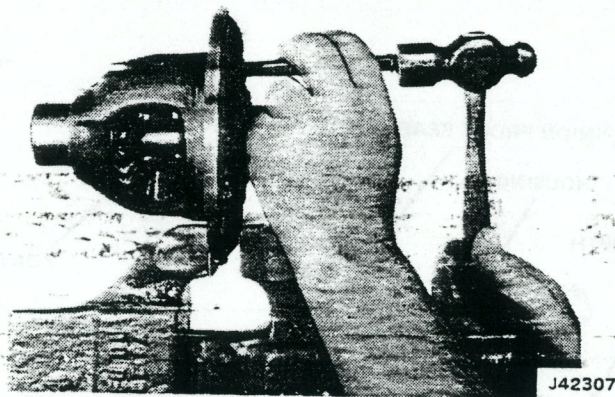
F-48 Pinion Mate Shaft Lockpin Removal
